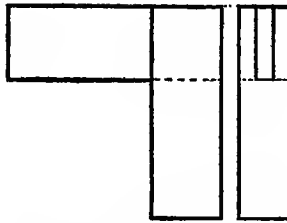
Mechanical Drawing of Slip Mortise and Tenon Joint
